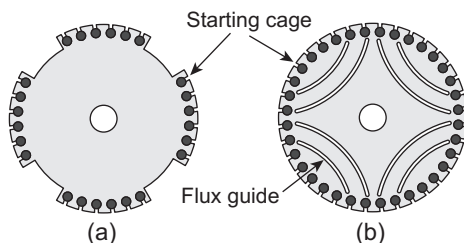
Reluctance motor rotors (4-pole) – (a) salient type, (b) flux-guided type.
